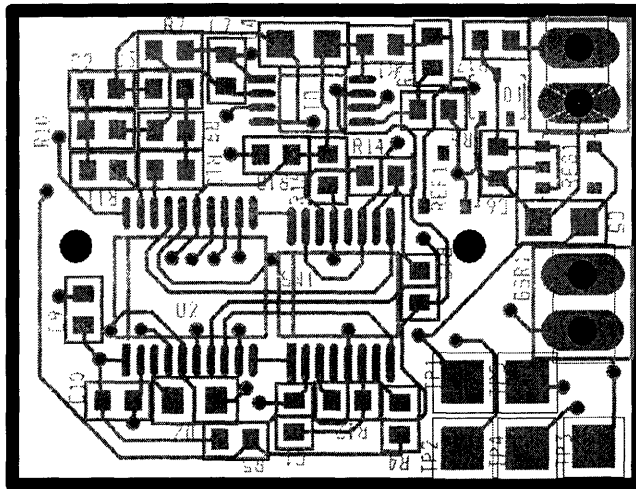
HandWave amplification board top side layout - solder mask and silk screen
